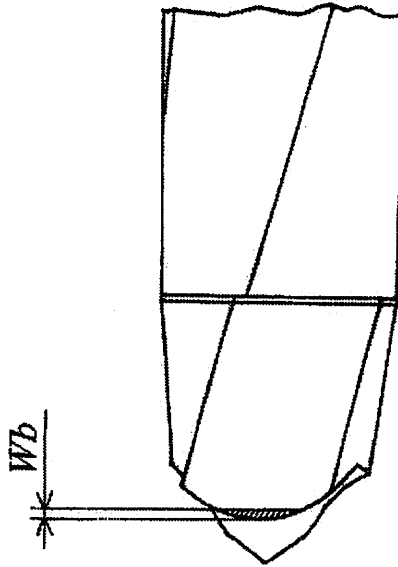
Tool-wear measurement (Wb) of spur machine-bit.
